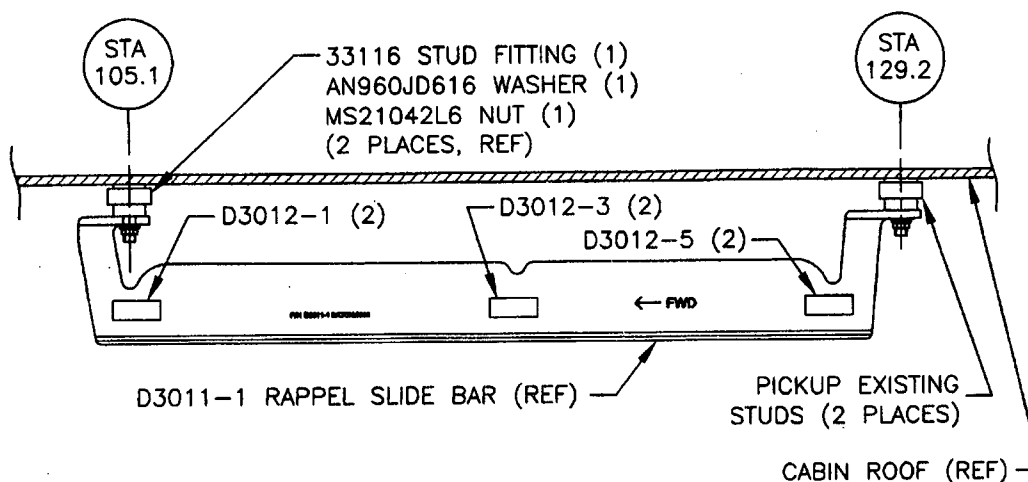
Installation of D205-523-043 Slide Bar Assembly
